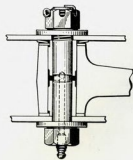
Steering Crank or Intermediate Arm Bearing. A Special Spring Washer Automatically Imparts the Desired Amount of Friction Drag to the Bearing
